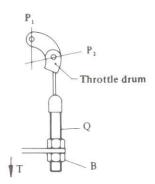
Kickdown (throttle) cable end fitting at carburettor (Sec 7)
